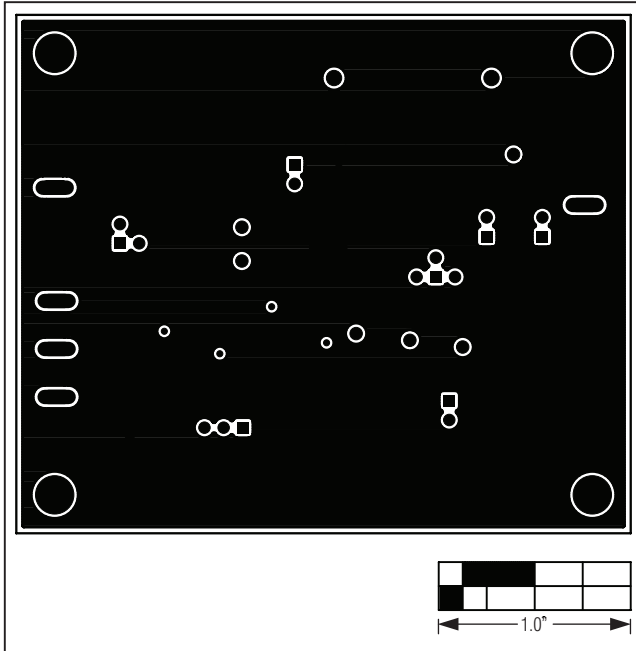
MAX16946 EV Kit PCB Layout—Inner Layer 3
